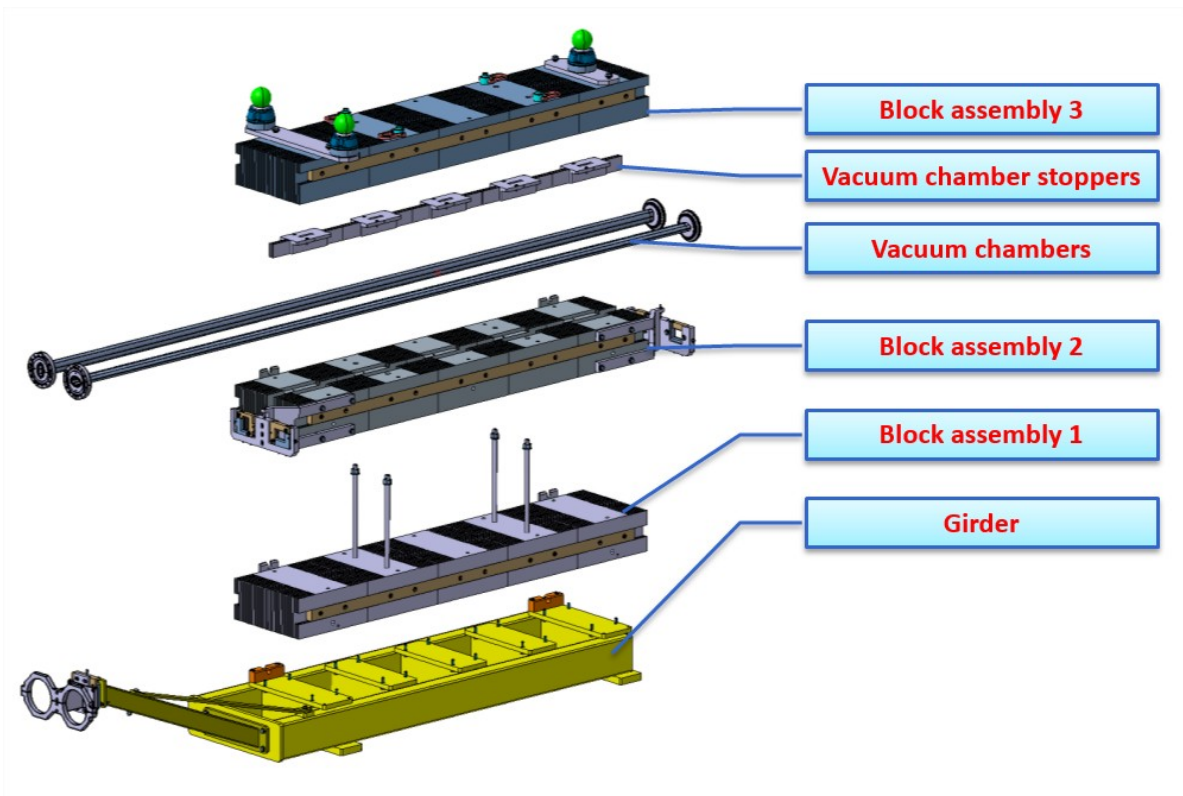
The three assembly blocks of the TCAPM. Courtesy of L. Gentini [8].
